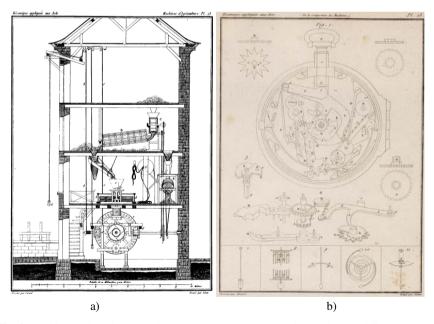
Machine designs by Borgnis: a) a water pump system; b) clock assembling
